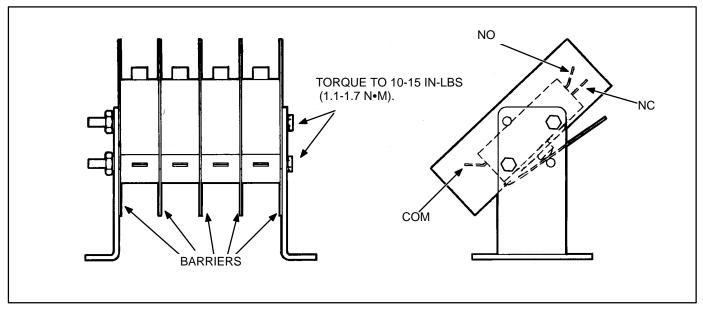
AUXILIARY SWITCH (300 TO 600 AMPERES)
